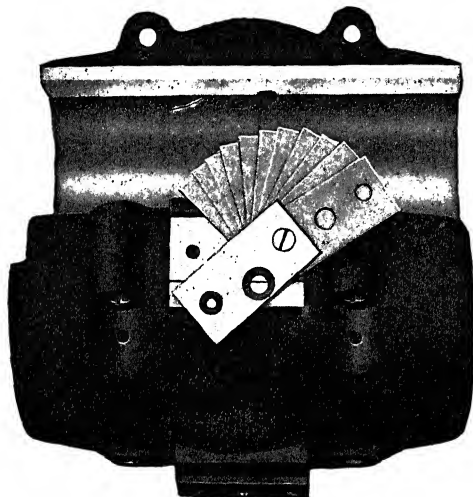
Padded Bearings, showing Adjusting Liners behind Steel Pads
